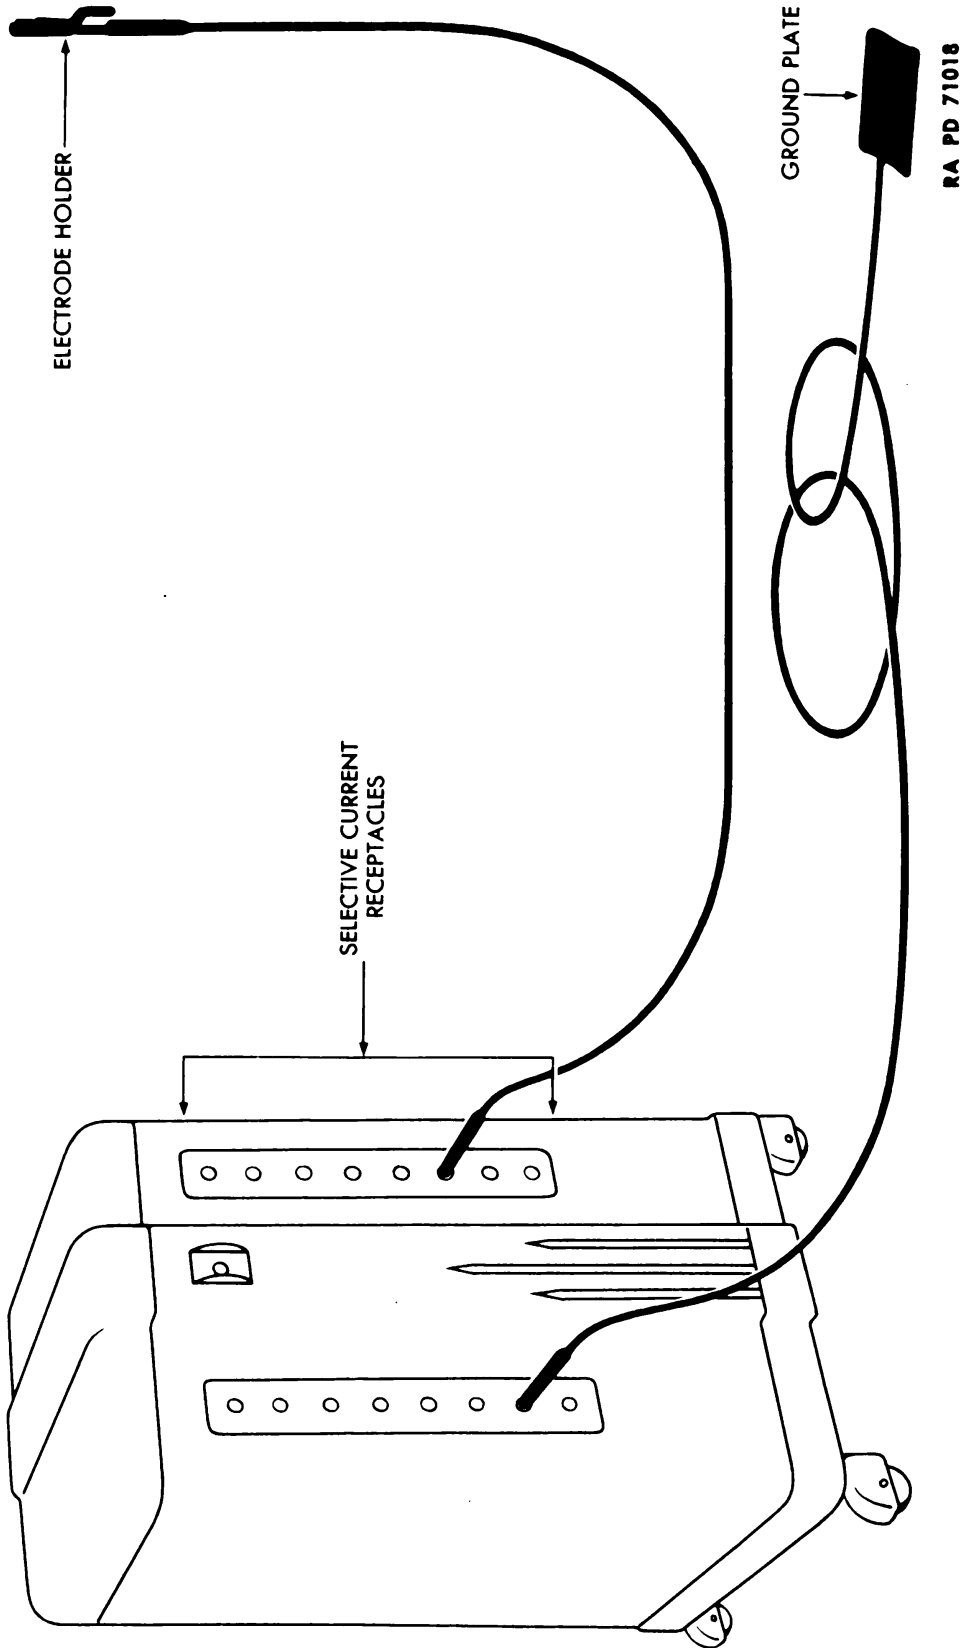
Typical Transformer-type Alternating-current Arc-Welding Machine
